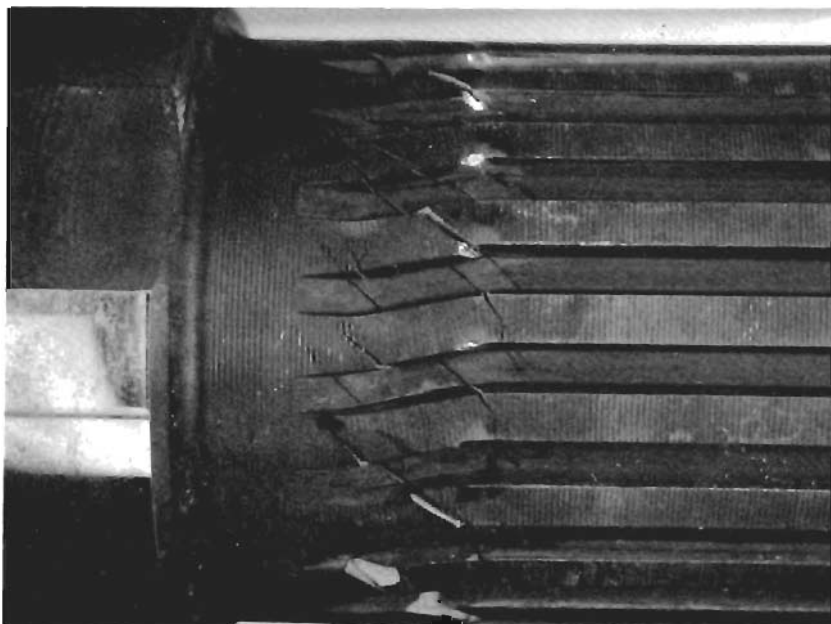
Splined section of a pinion shank. Torsional tensile fatigue in one direction showing the 45° tensile failure lines and evidence of longitudinal shear cracking.
